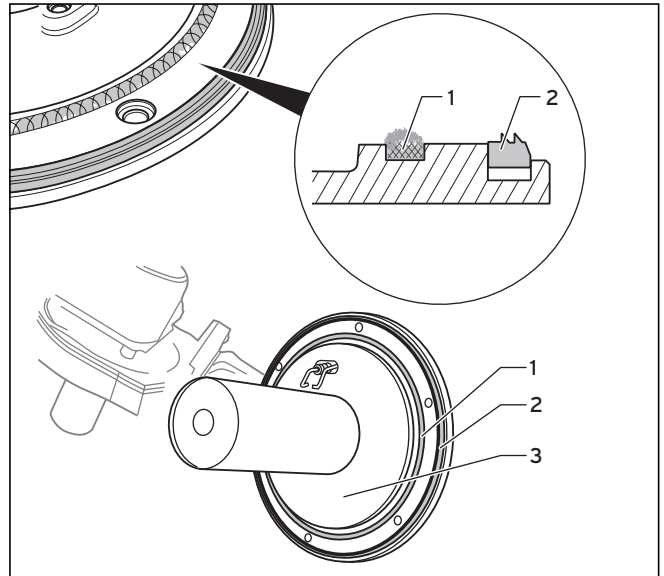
Replacing the seals and the insulating layer on the burner door
